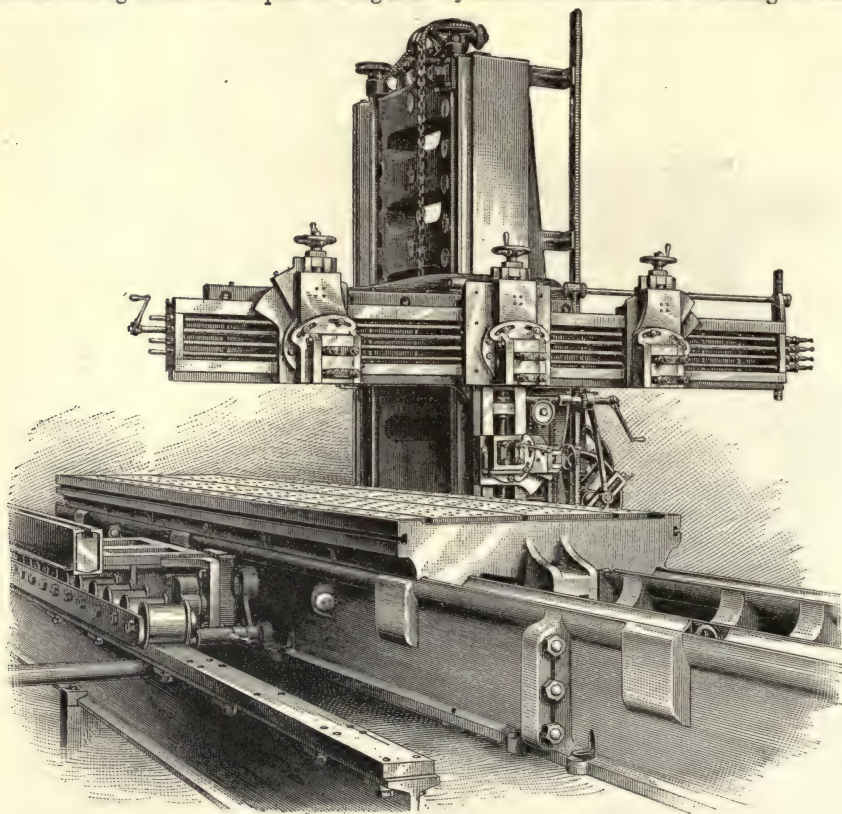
Open-side extension planer.—View showing outer post removed.
